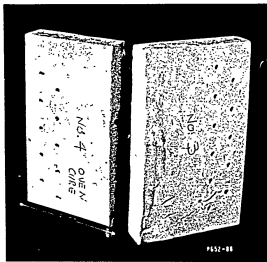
Polyester polyurethane Hooker 126A weld test (Nos. 3 and 4).
